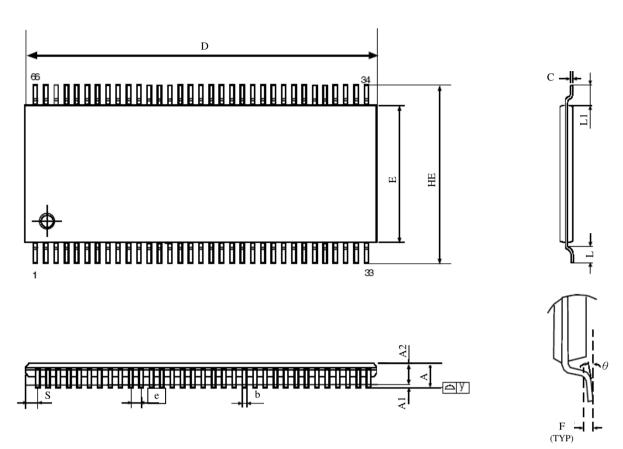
66 Pin TSOP II Package Outline Drawing Information
